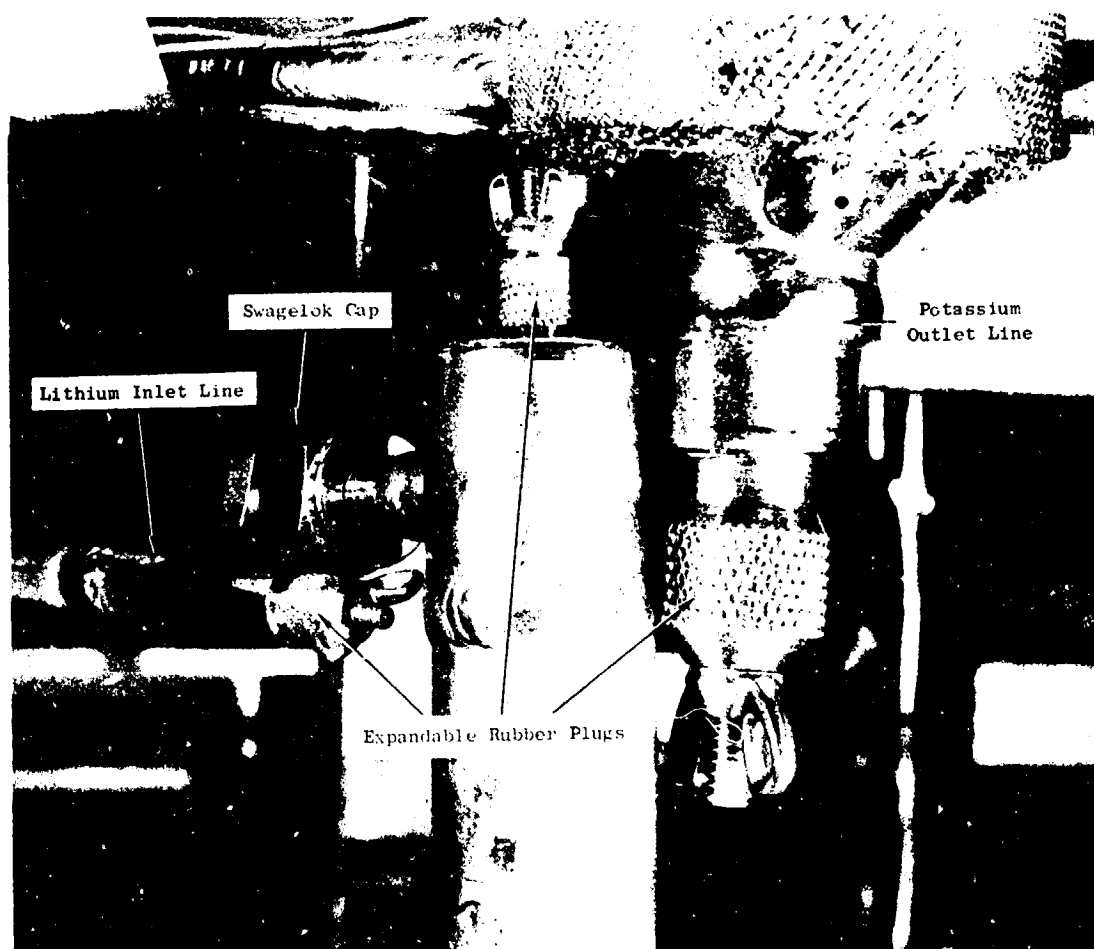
Top of Boiler After Cutting and Sealing Lithium Inlet and Potassium Exit Lines. (C680719137)
